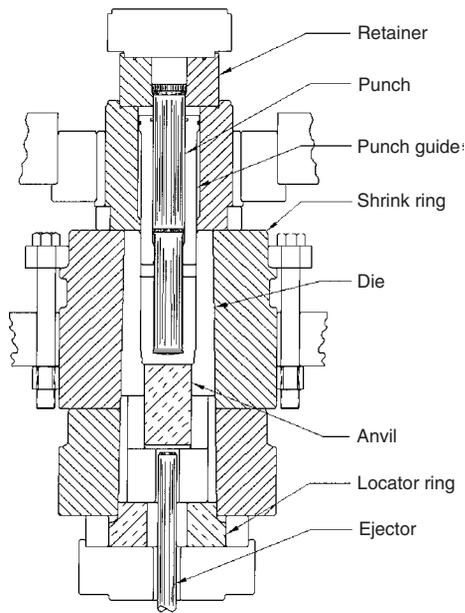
Tools constituting a typical setup for the backward extrusion of steel parts
